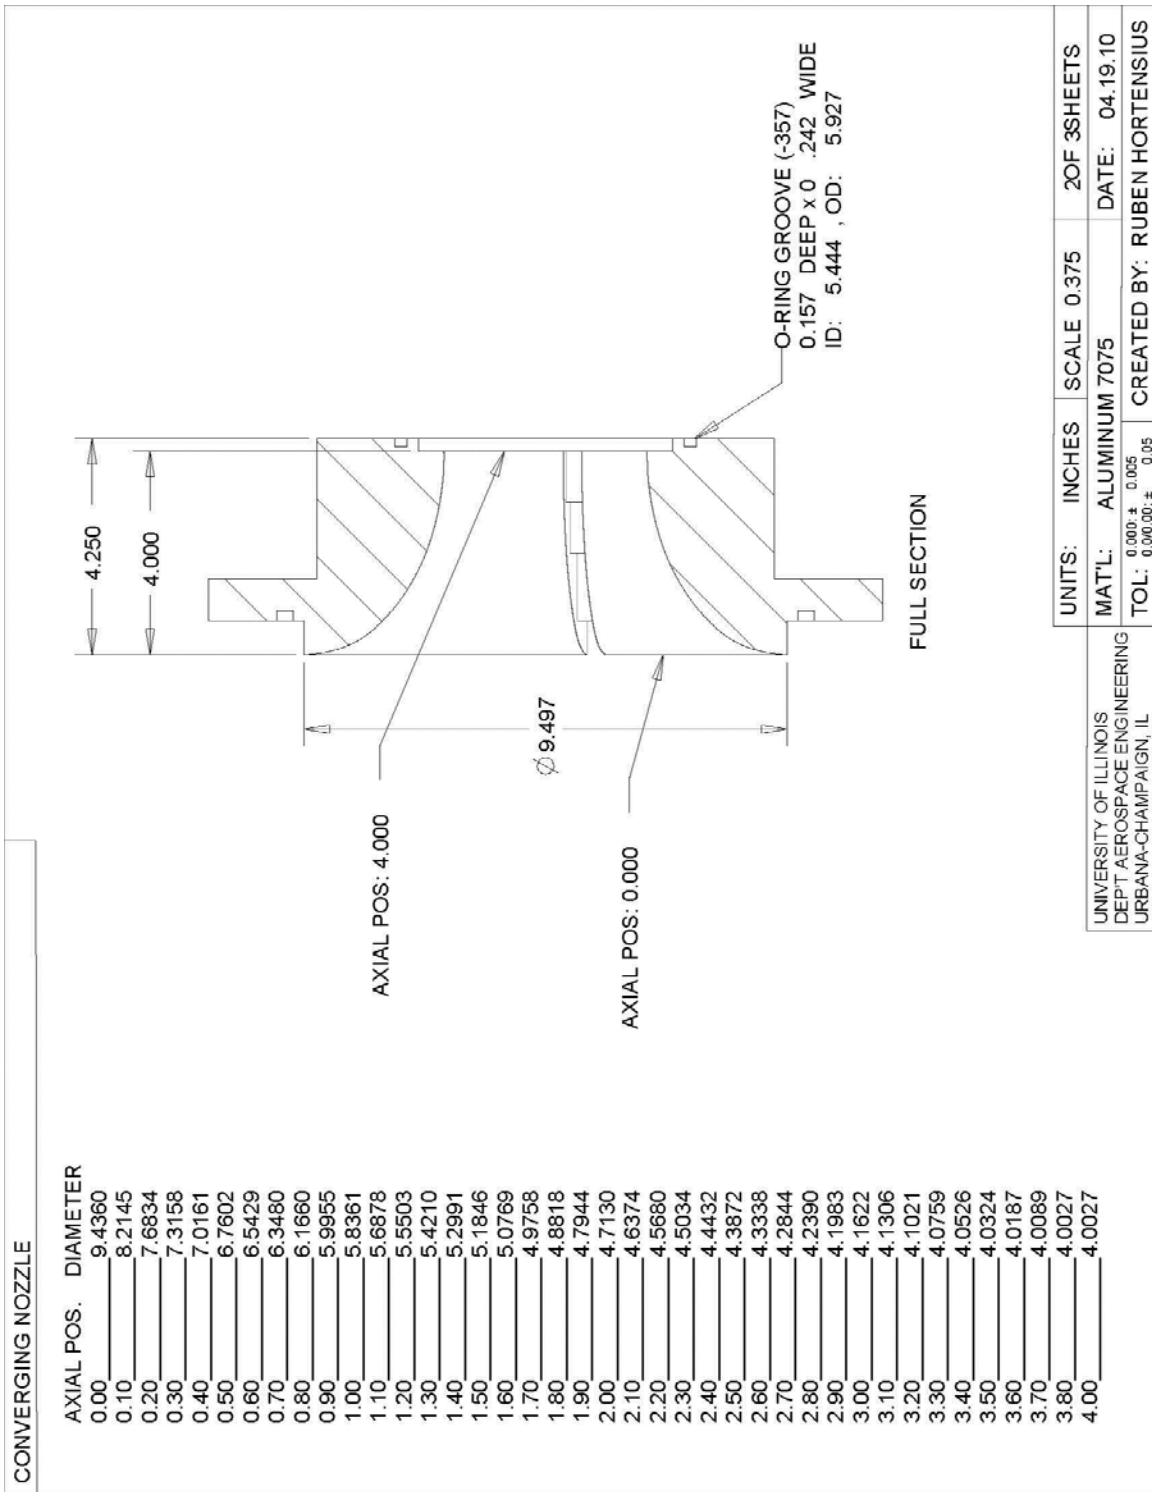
(cont.). Converging Nozzle Engineering Drawing.
